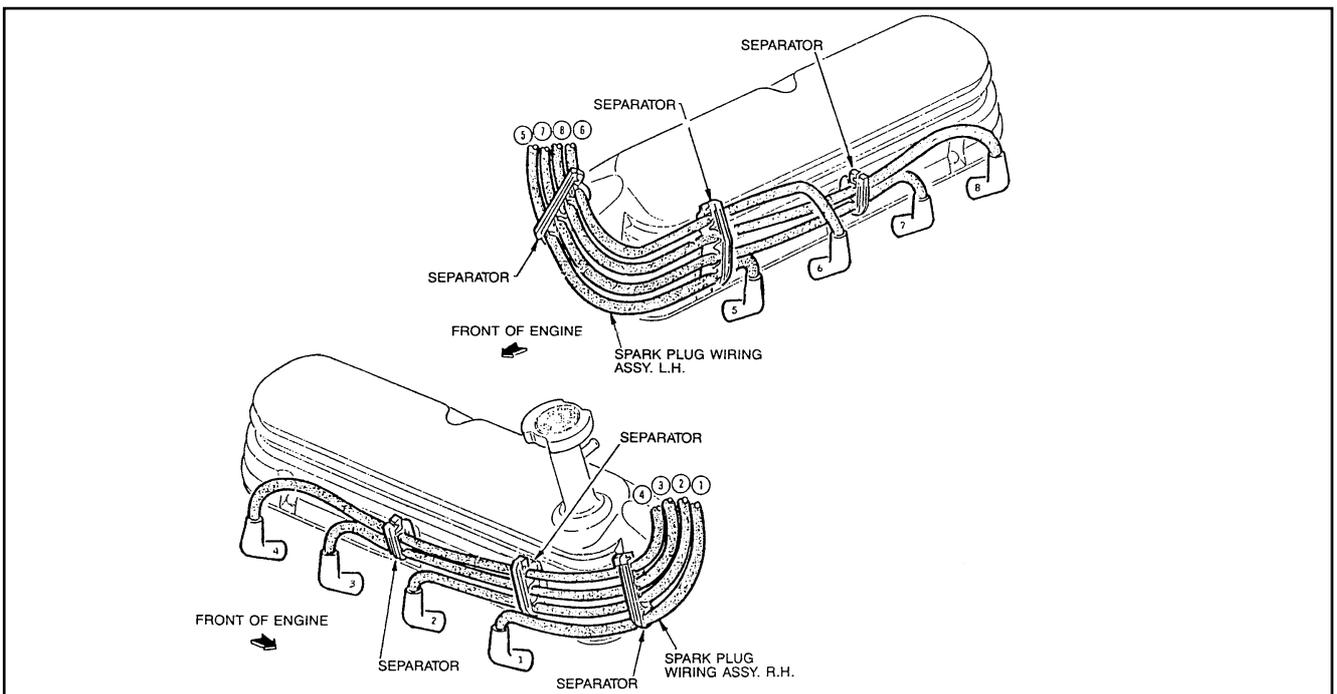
Spark Plug Lead Installation - 8 Cylinder
